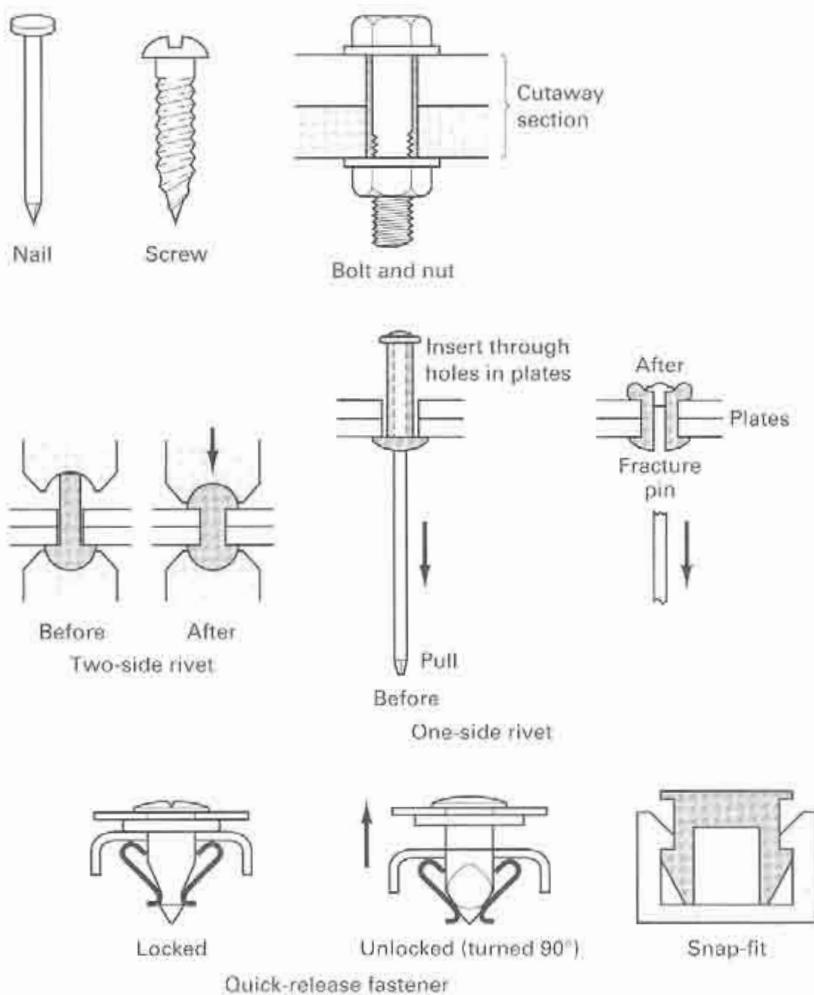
Various types of discrete fasteners, including a nail, screw, nut and bolt, two-side access supported rivet, one-side access blind rivet, quick-release fastener, and snap-fit.
